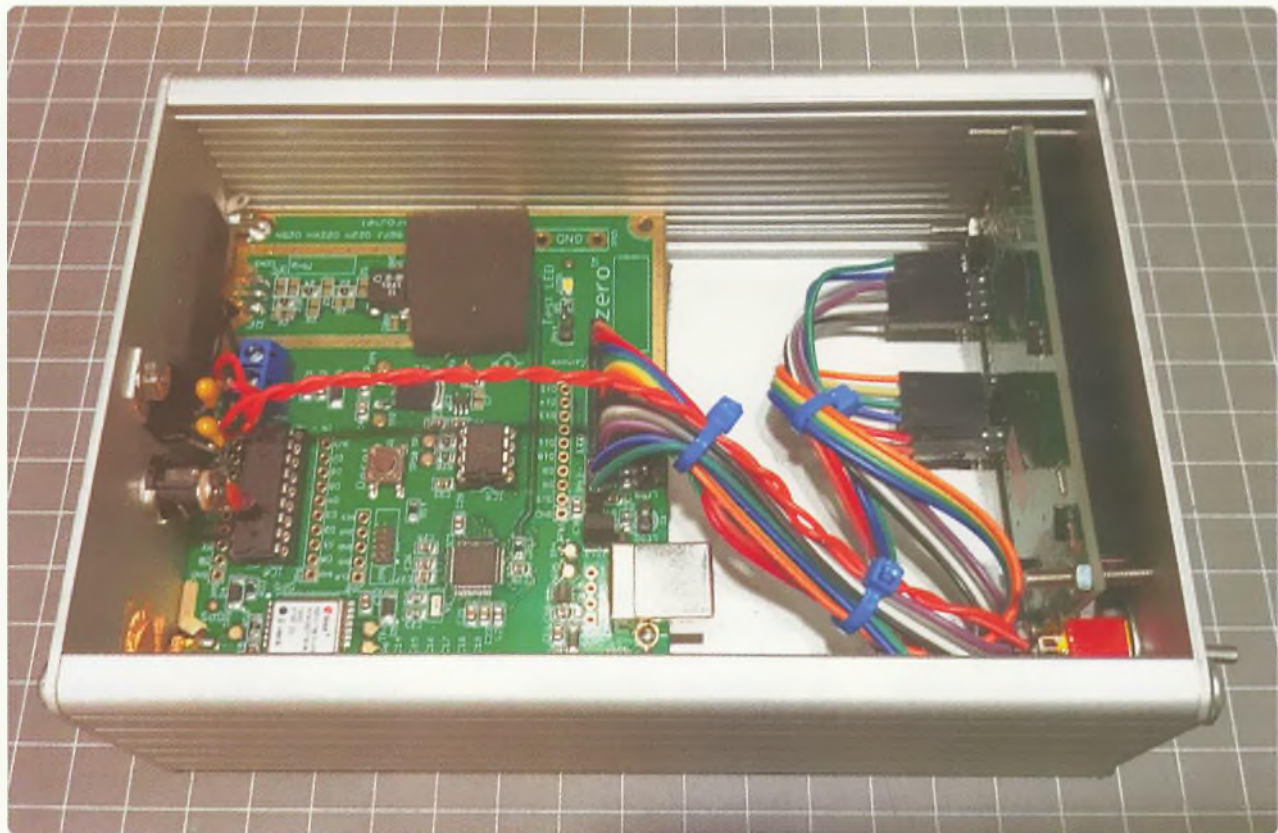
The RFzero PCB mounted inside a Eurocard enclosure.
